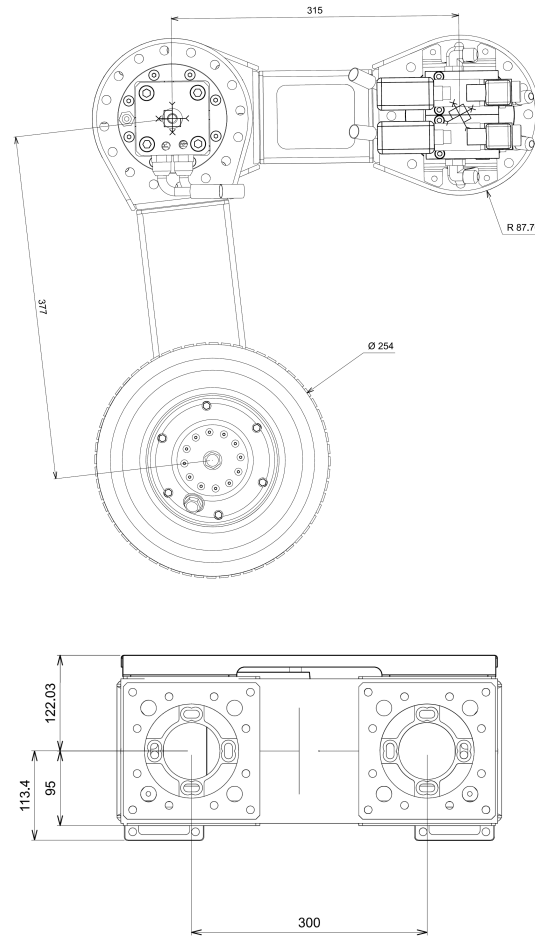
Complete MHT Leg Assembly and Main Structure (mm)
